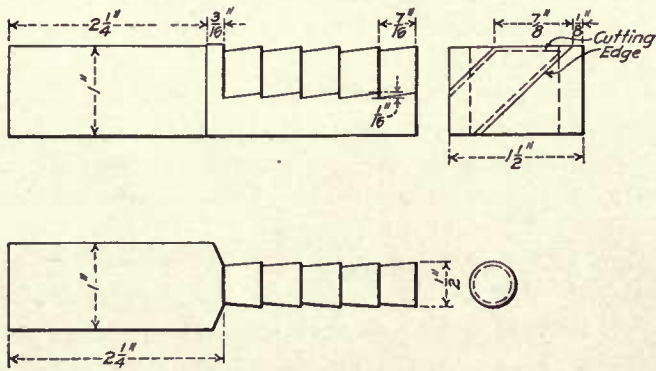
Tool for Cutting Ports in Piston Valve Bushings.
